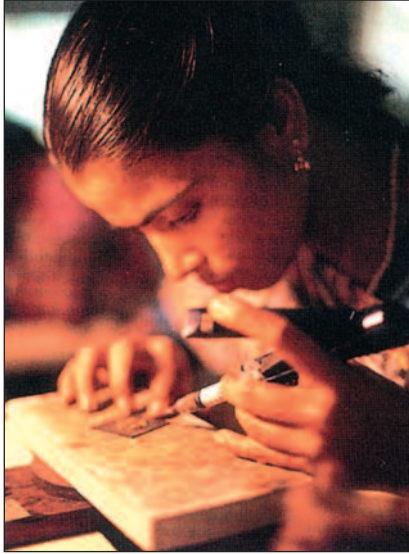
Application of solderpaste to traditional 22 ct gold jewellery
